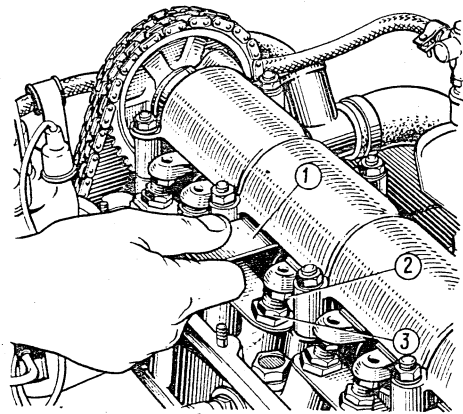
Checking the Lever-to-Cam Clearance:
